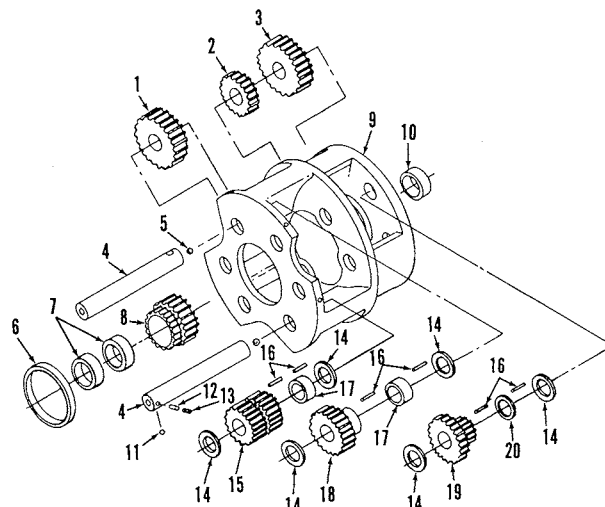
Exploded view of output planetary carrier used on 4450, 4650 and 4850 Power Shift models.
